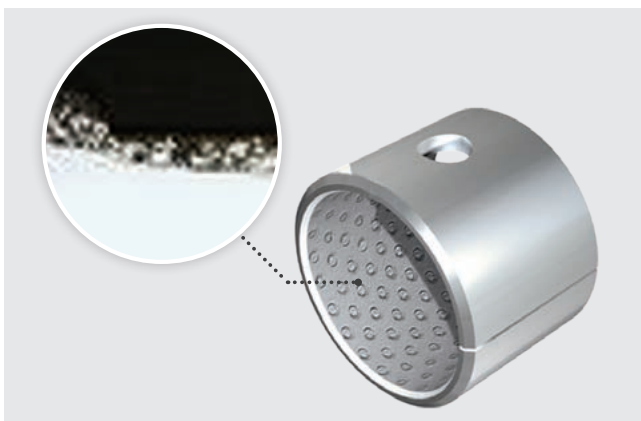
P200 – Plain bearings with oil distributing pocket and oil hole
